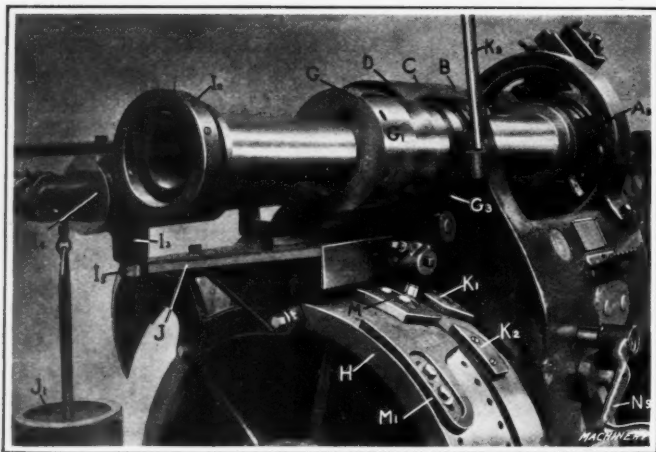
End View of Gridley Single-spindle Automatic Turret Lathe, showing Cams for opening and closing Chuck and advancing Turret Slide, also Cams for operating Stock Pusher
